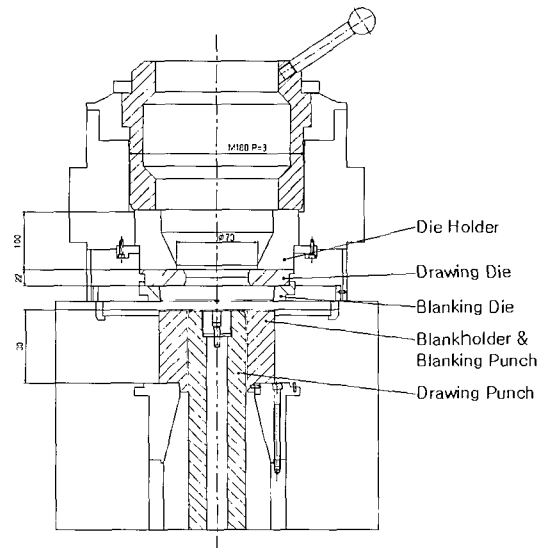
Sectional view of assembled die parts in universal sheet metal testing machine
